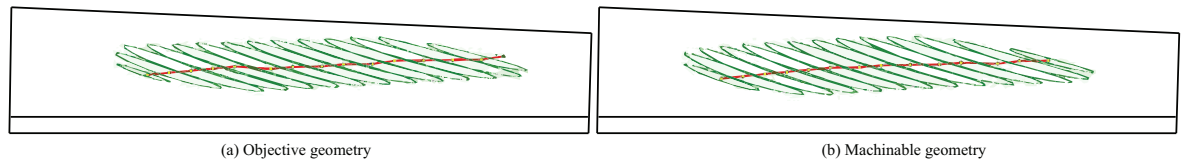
Contact pattern on the concave side of the pinion tooth surfaces - CASE 3.
